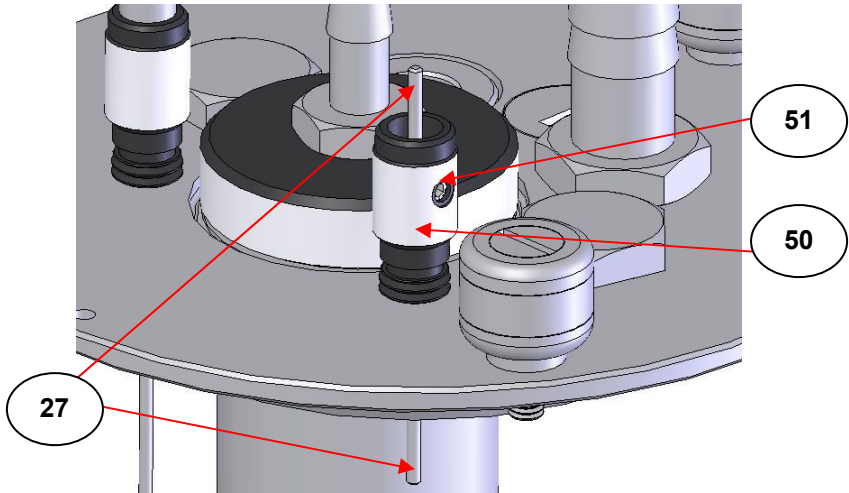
Screw Nut and Blanking Rod at Monitoring Thermocouple Port Position on the VT Cell Accessory
